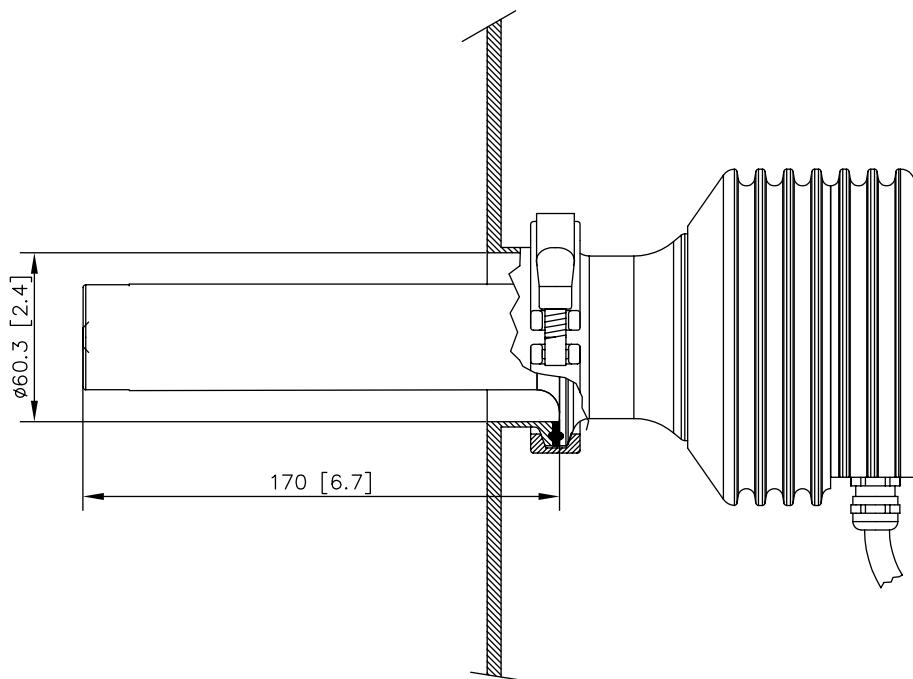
Insertion of Probe refractometer PR-23-AP62-TSS
